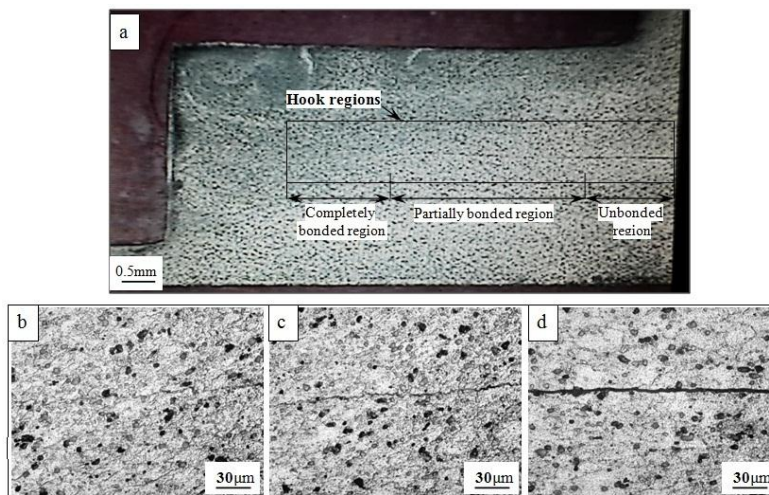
Typical cross-sectional views show the bonding regions in conventional FSSW specimens welded by different tool pin profiles, (a) a cross-sectional macrograph, (b, c, and d) close-up views of completely bonded region, partially bonded region, and unbonded region, respectively
